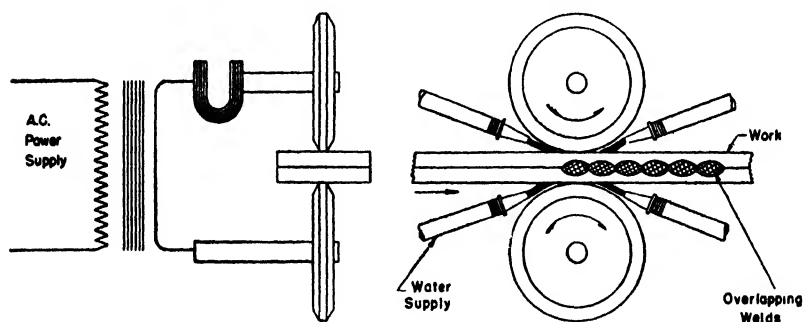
Schematic diagram of welding circuit and arrangement of wheels for seam welding.
